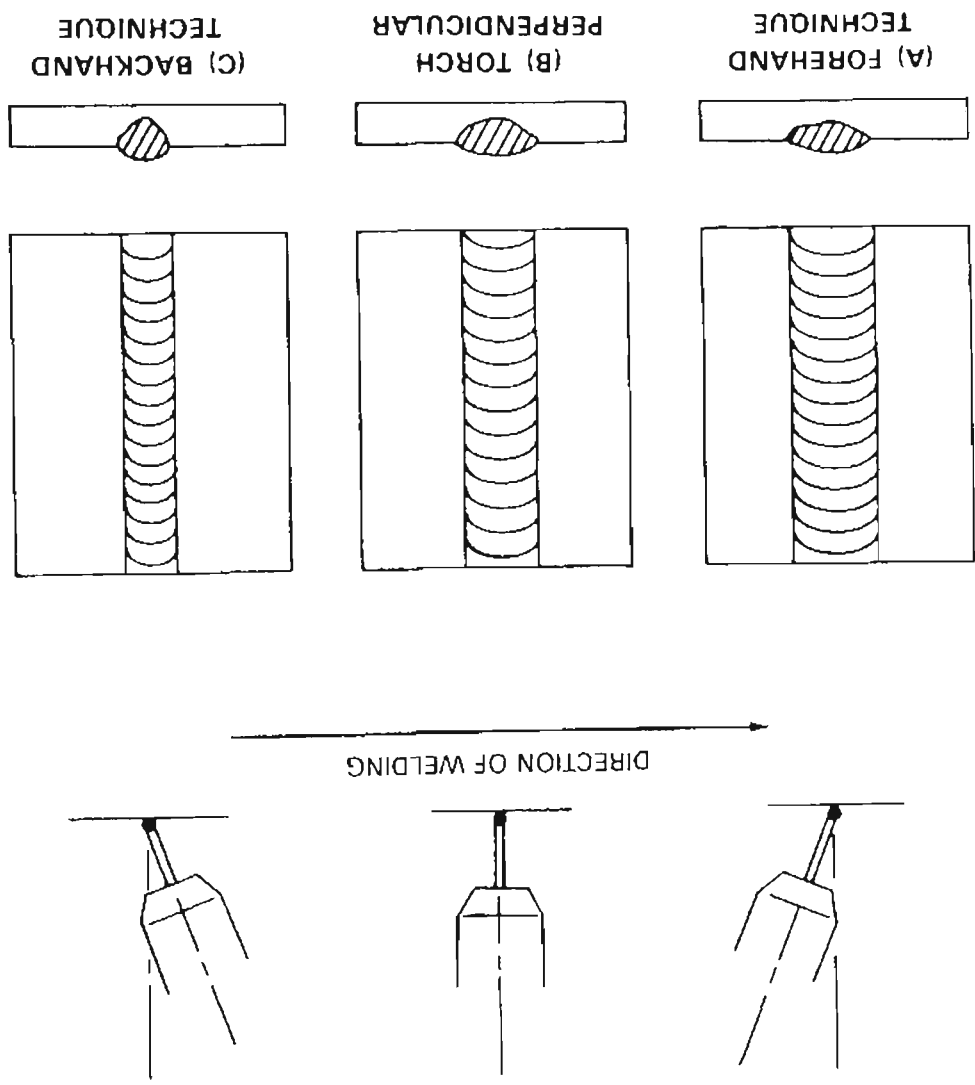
Electrode orientation and its effect on the weld bead profiles and penetration [After Welding Handbook Vol.2 1991].
